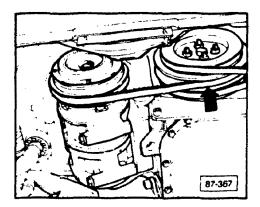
A/C compressor V-belt (4-cylinder engine)
